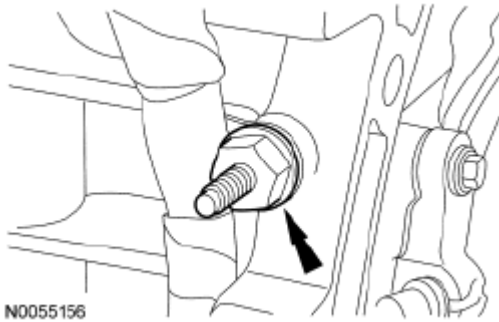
Locating Wiring Harness Retainer Stud Bolt
